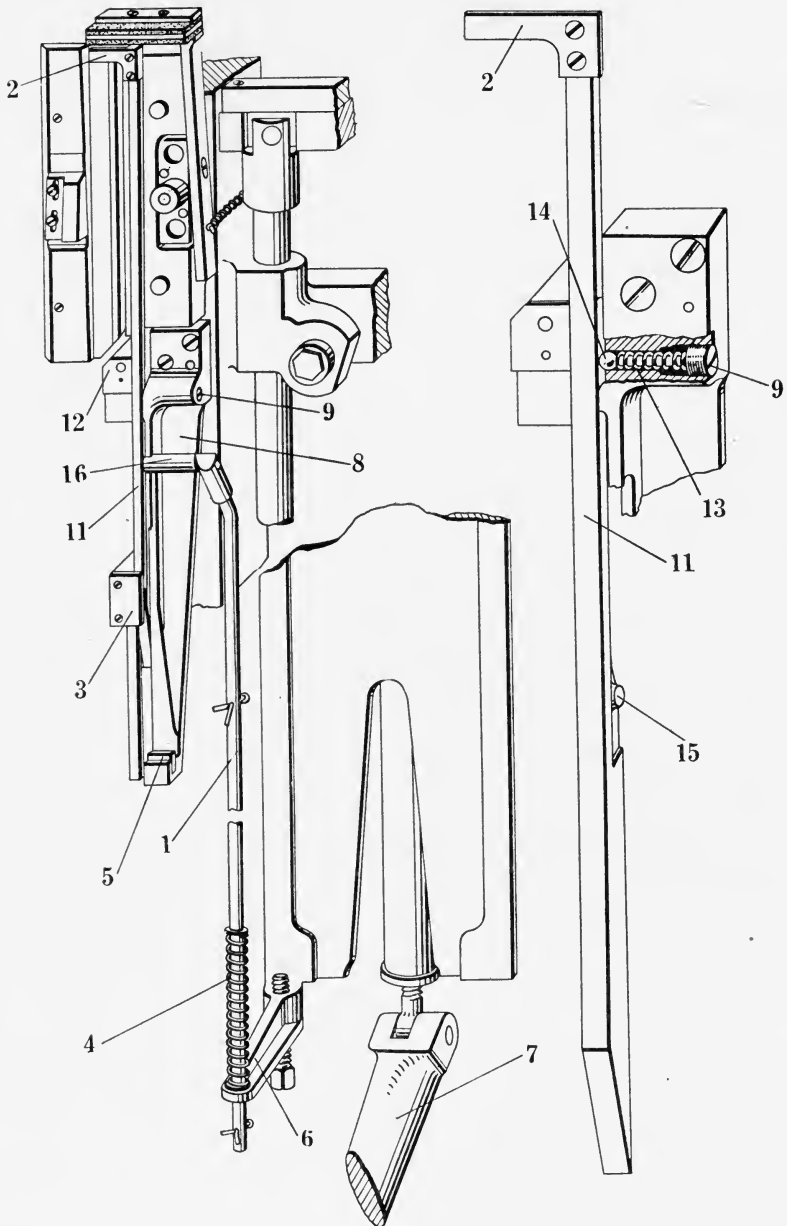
New Style Knife Wiper for the 30-em machine. The wiper blade 2 removes the shavings from the side knives, which trim the slug to the size for
